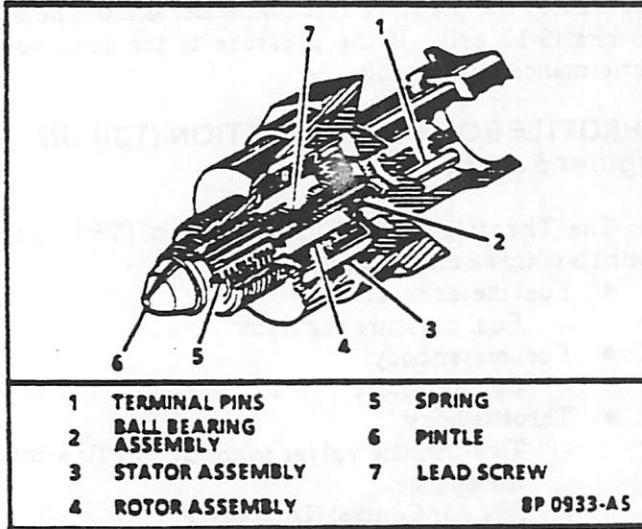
Idle Air Control (IAC) Valve Assembly (Typical Thread Mounted)
